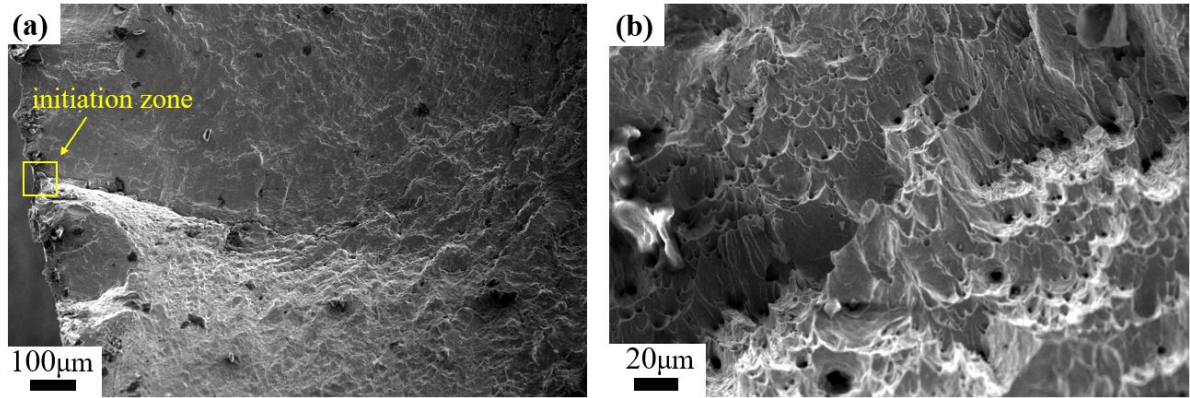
The fatigue fracture surface of unburnished 316L sample broken in 33.842cycles, at 95% of σ_{yield} (a) crack initiation zone, (b) Tearing zone.
